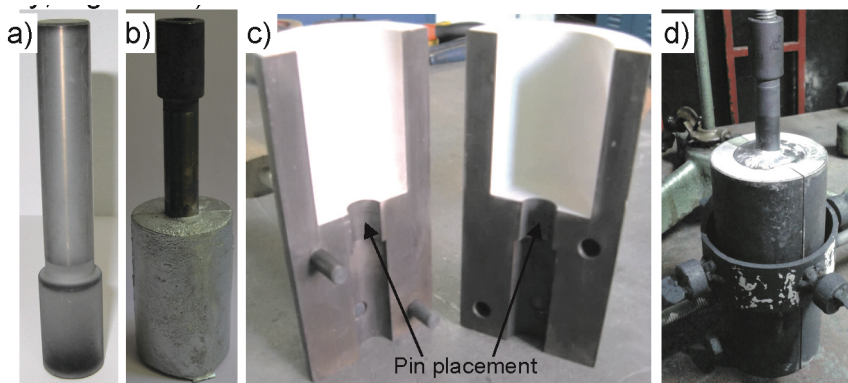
a) experimental pin, b) pin-casting assembly, c) experimental die
